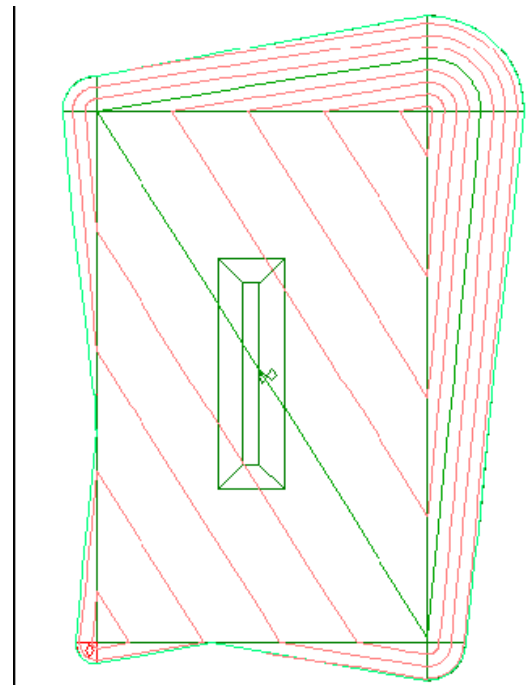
Two surfaces combined. Island is removed because it was added before the pad.
